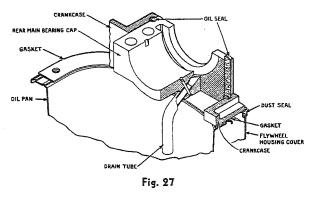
illustrates the assembly of the crankshaft front seal, retainers and oil pan gaskets and Fig. 27 illustrates the rear assembly.
